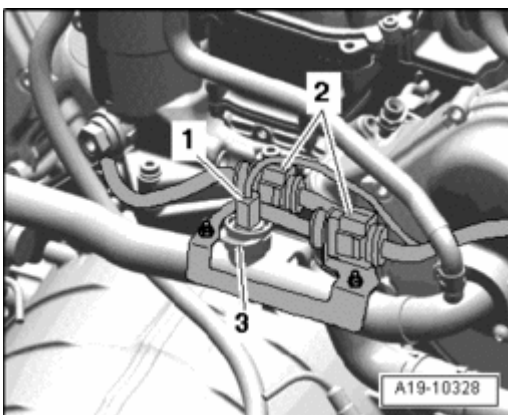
Disconnecting Electrical Harness Connector At Engine Coolant Temperature (ECT) Sensor
